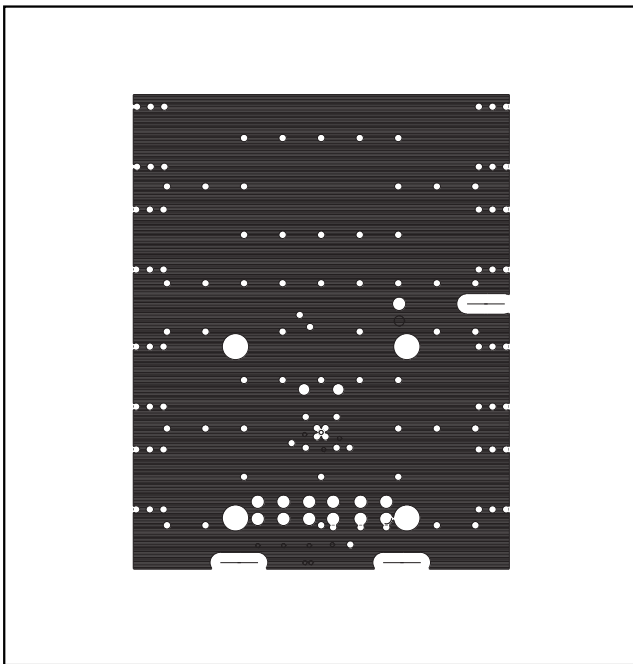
MAX3274 EV Kit PC Board Layout—Power Plane
